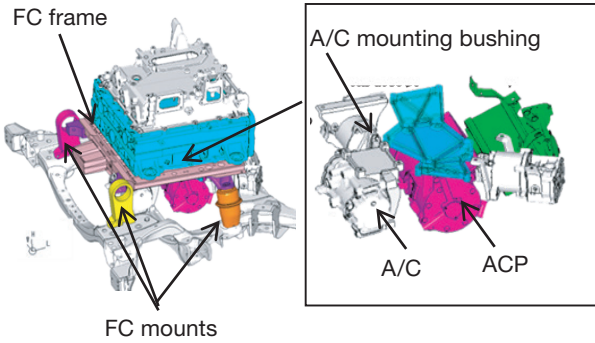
Stack Mounting System and Layout of Auxiliary Equipment
